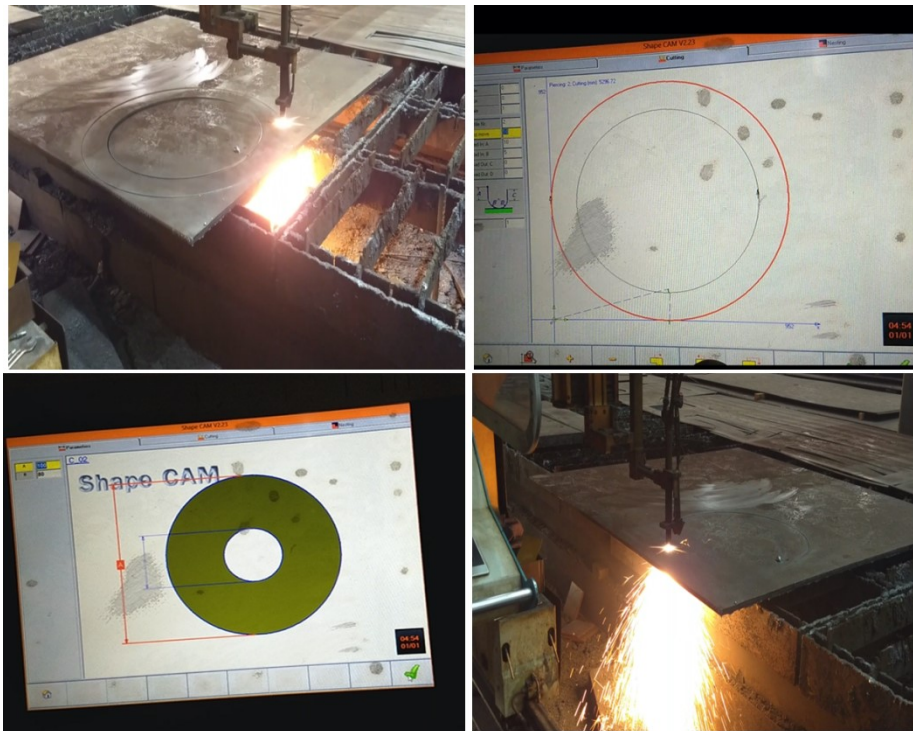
closing plate cutting for classifier shell by using oxy gas cutter
